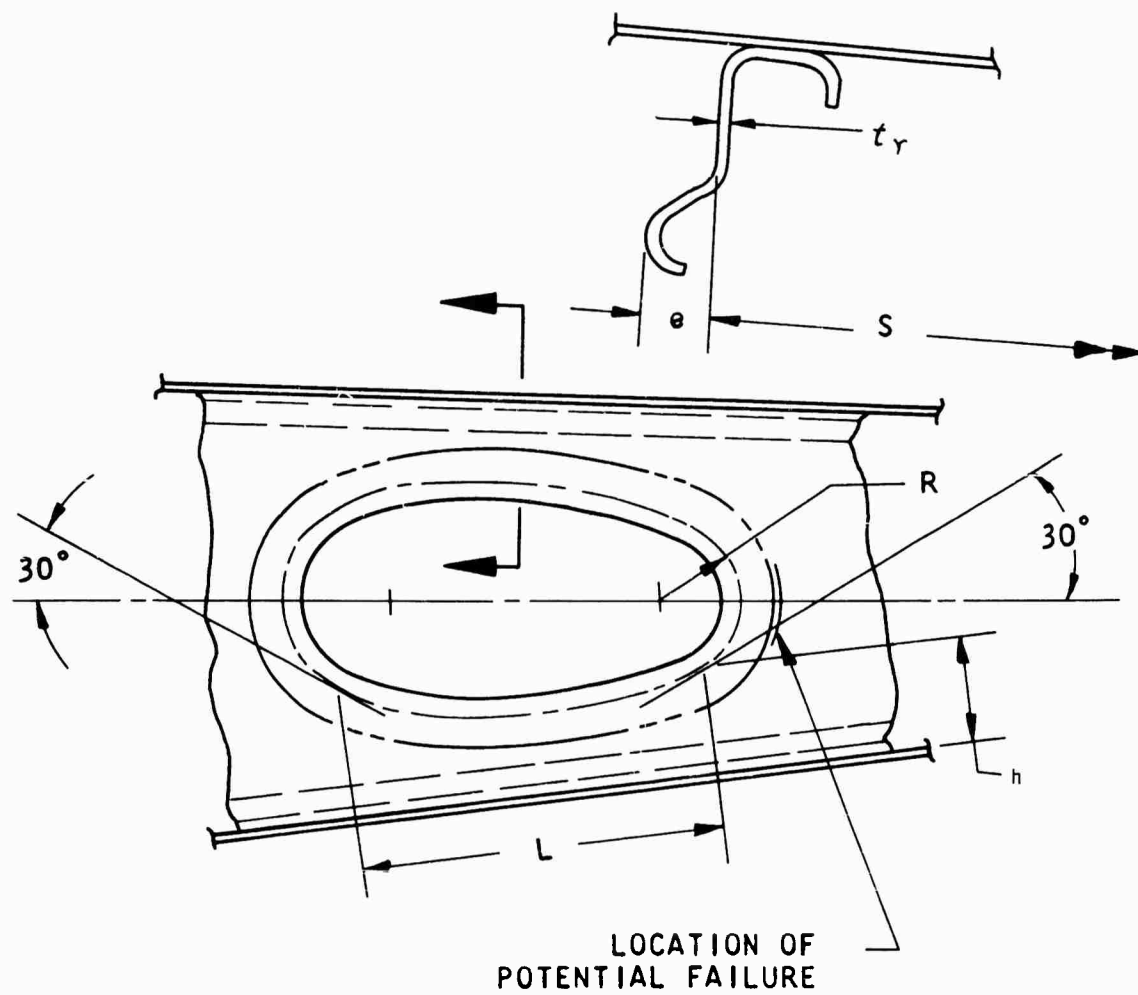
SKETCH RIB WITH LIGHTENING HOLE
